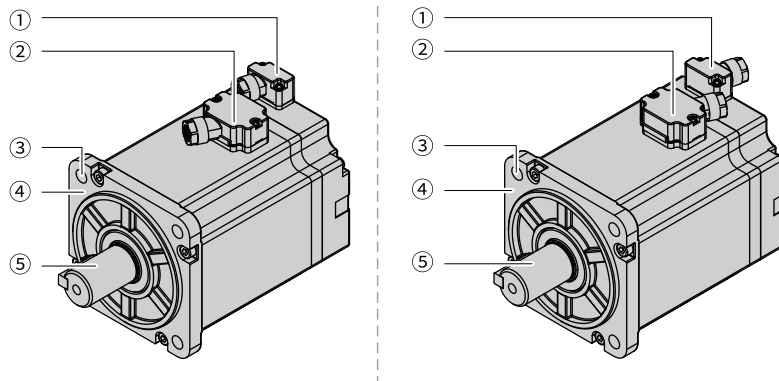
Components of terminal-type motors (Left: motor with front cable outlet; Right: motor with rear cable outlet)
